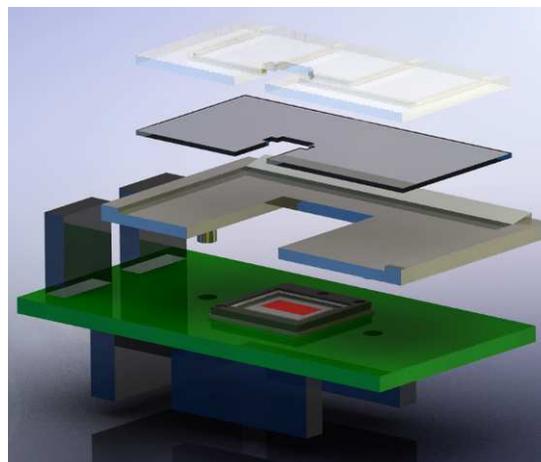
Schematic of surface assembly of the lightpipes. From top to bottom: PMMA lightpipes, sealing foil, lightpipe holder with deflection element, CMOS imager mounted on PCB.
